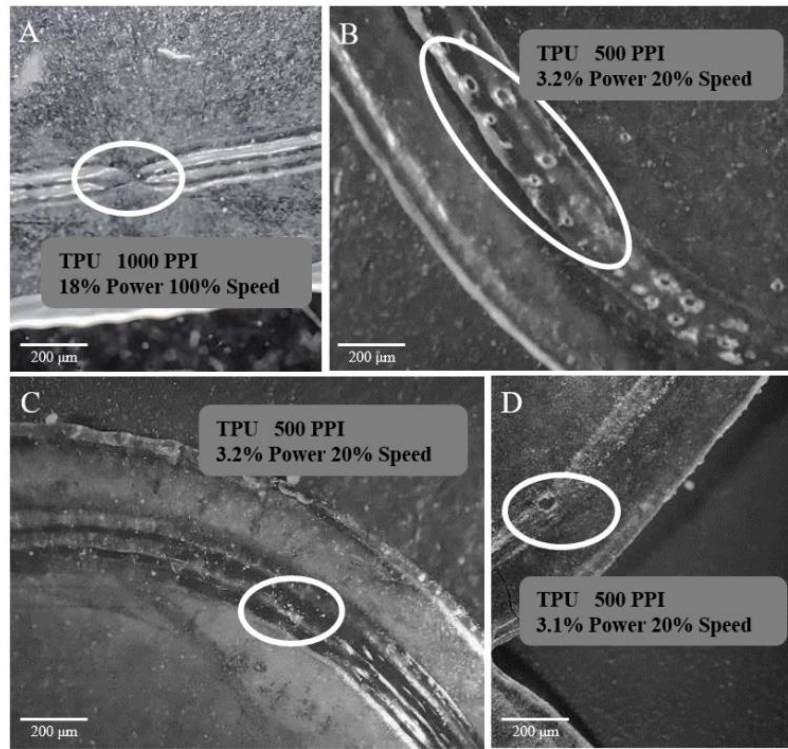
Causes of failure under different fabrication parameters. (A) Heat sealing failure. (B) A large number of bubbles. (C) Unclean TPU surface. (D) Laser burn-through
